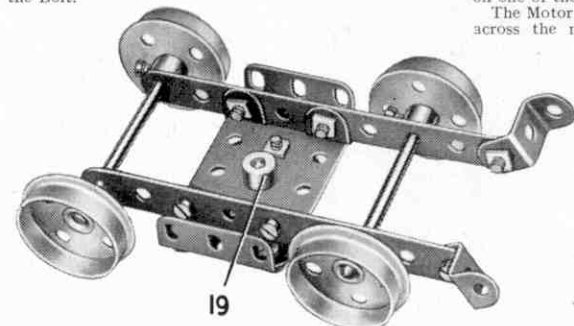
An underneath view of one of the bogie units showing the method used to attach the wheel bearings.
